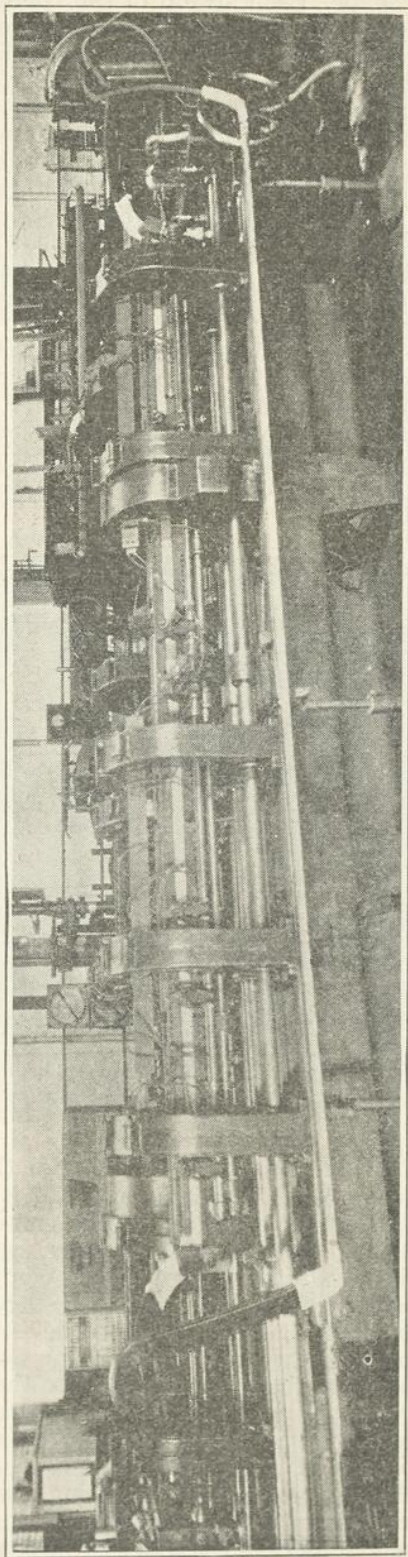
Coil in Wrapping Machine which Insulates the Embedded Portion.
